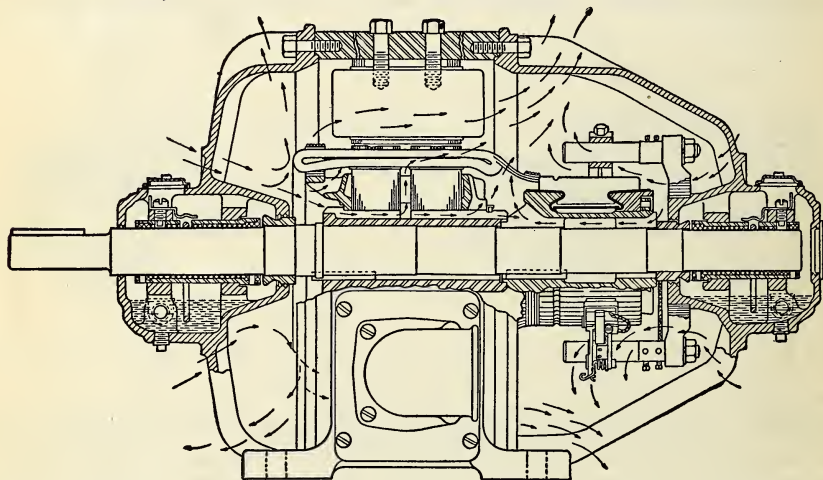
Except in the smallest sizes, armature cores are assembled so that air ducts are formed. Air circulates through them as shown here, keeping the core much cooler than it would otherwise be.
